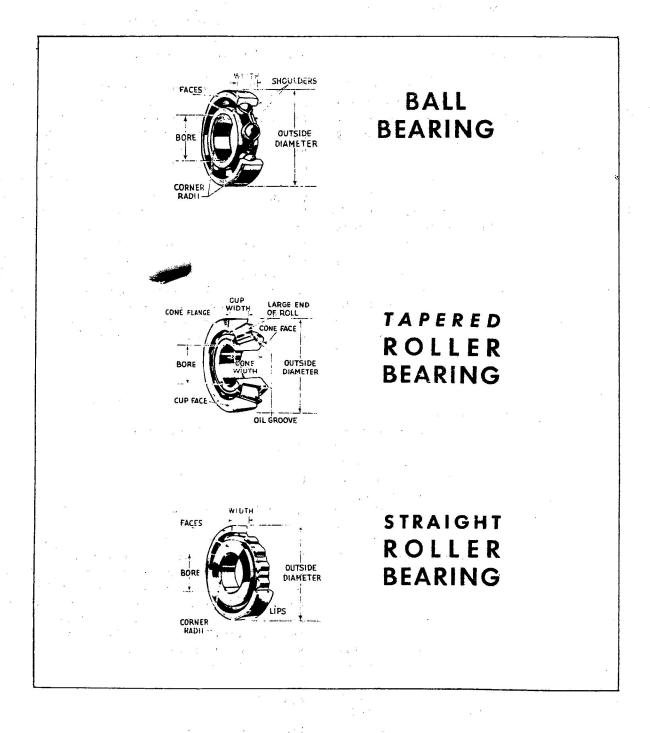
Ball Bearing - Tapered Roller Bearing Straight Roller Bearing
